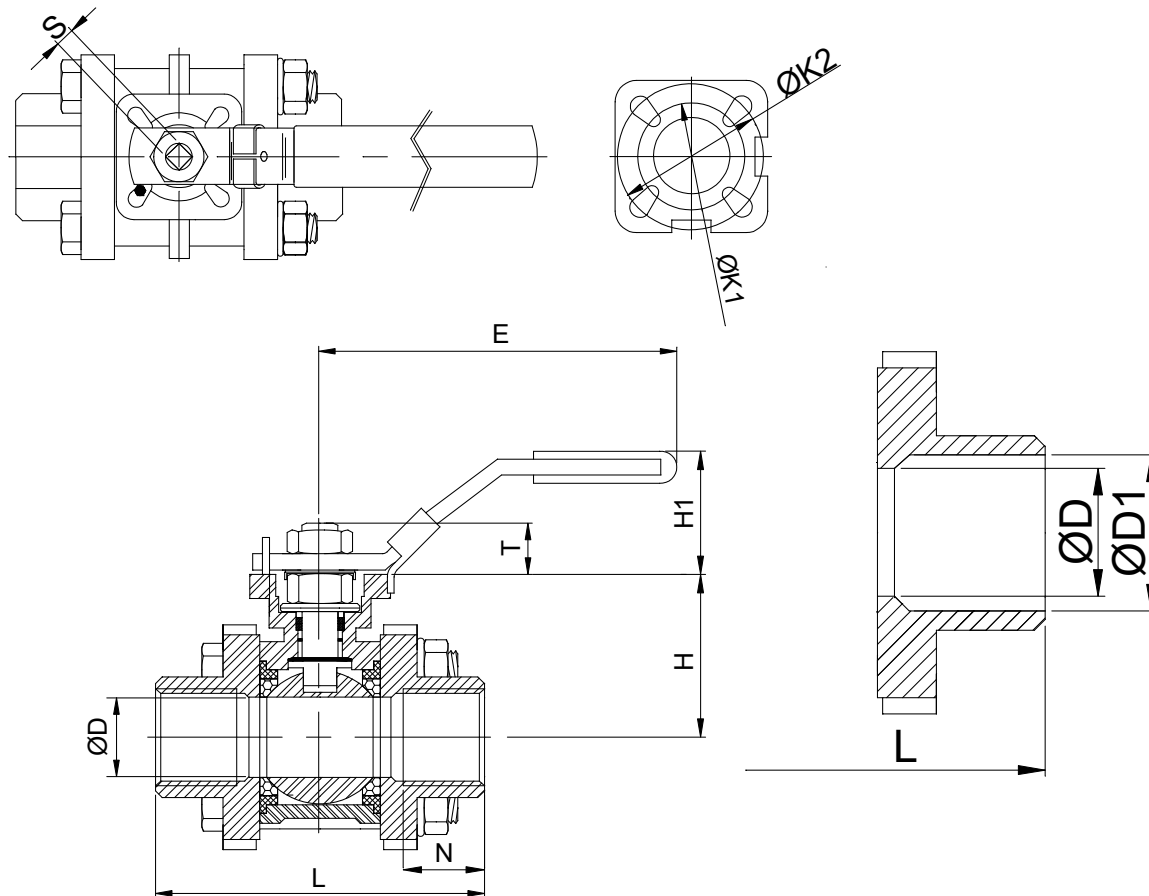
Dimensions; 1) Threaded end; 2) Butt weld end
